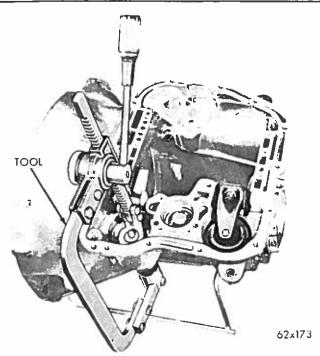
Compressing Kickdown Servo Spring (Tool C-3422)
